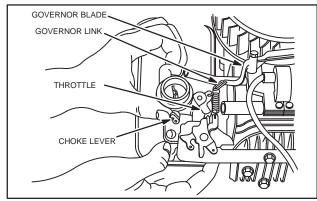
INSTALL CARBURETOR AND TANK ASSEMBLY
